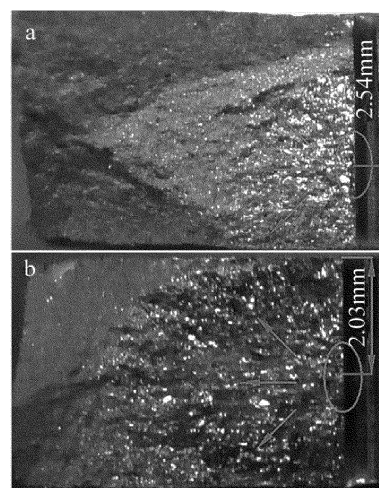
Fracture morphology of 7050-T7451 aluminum alloy
